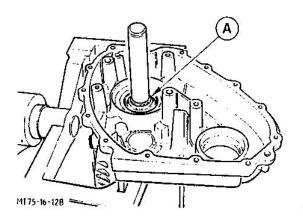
Remove transmission mainshaft bearing. A - Special Tool 16-044
